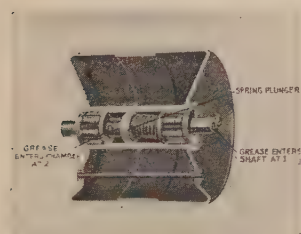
Stearns Sheet-steel Pulley with Grease Chamber.
